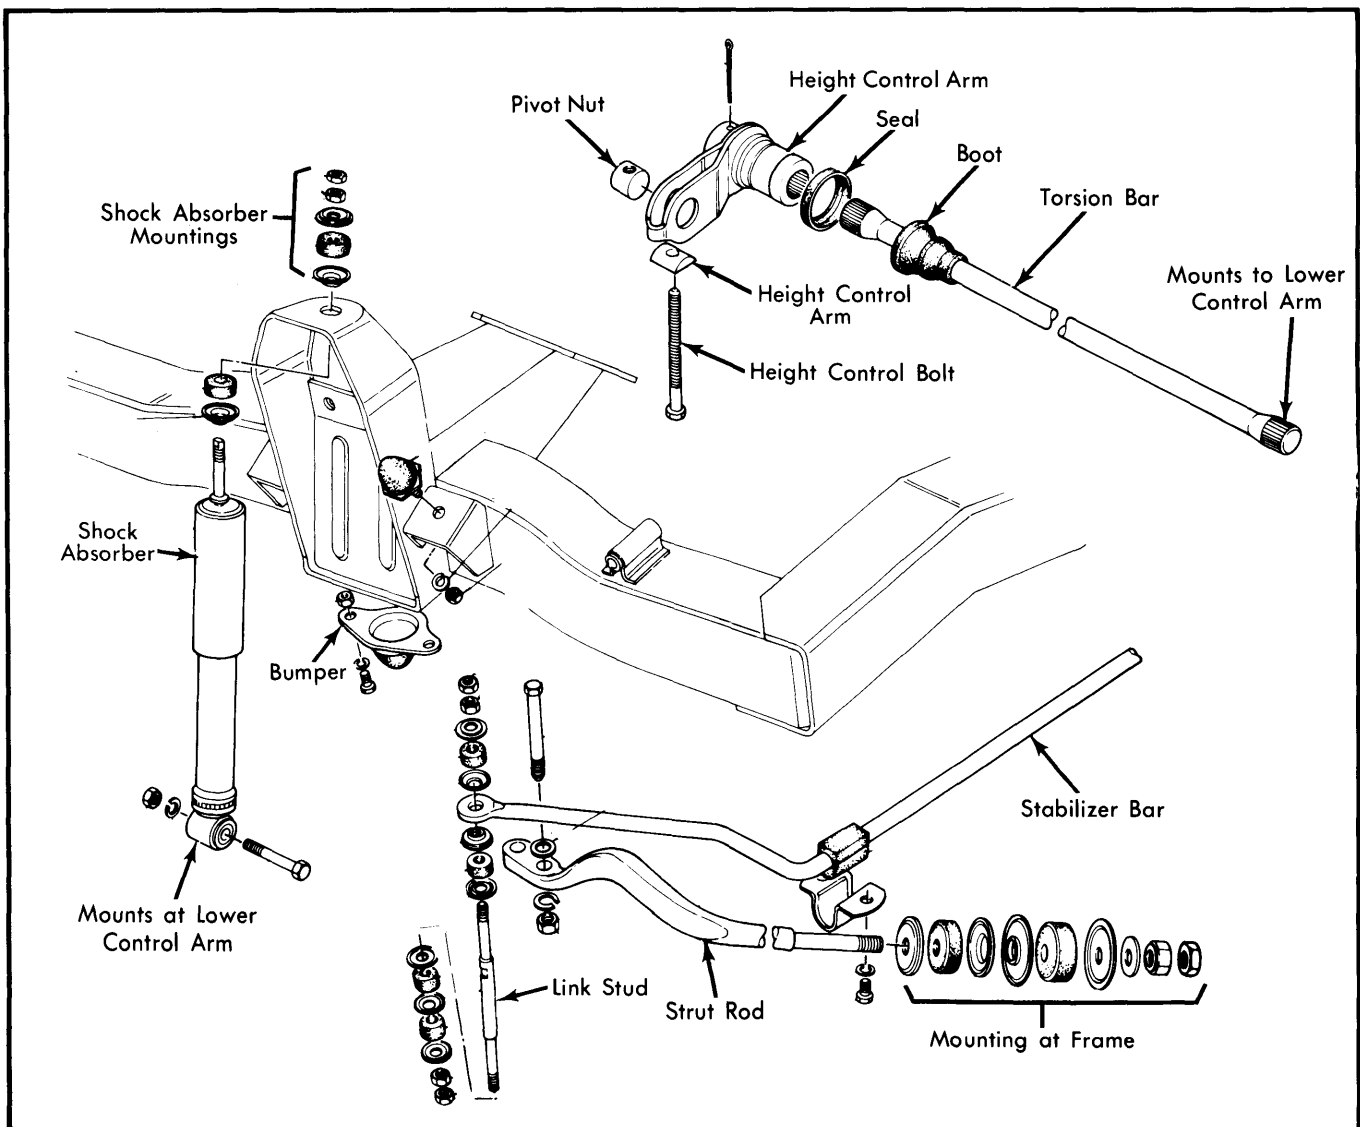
Exploded View of Torsion Bar, Stabilizer Bar, Strut Bar and Shock Absorber (2-Wheel Drive Shown; 4 x 4 Similar)
